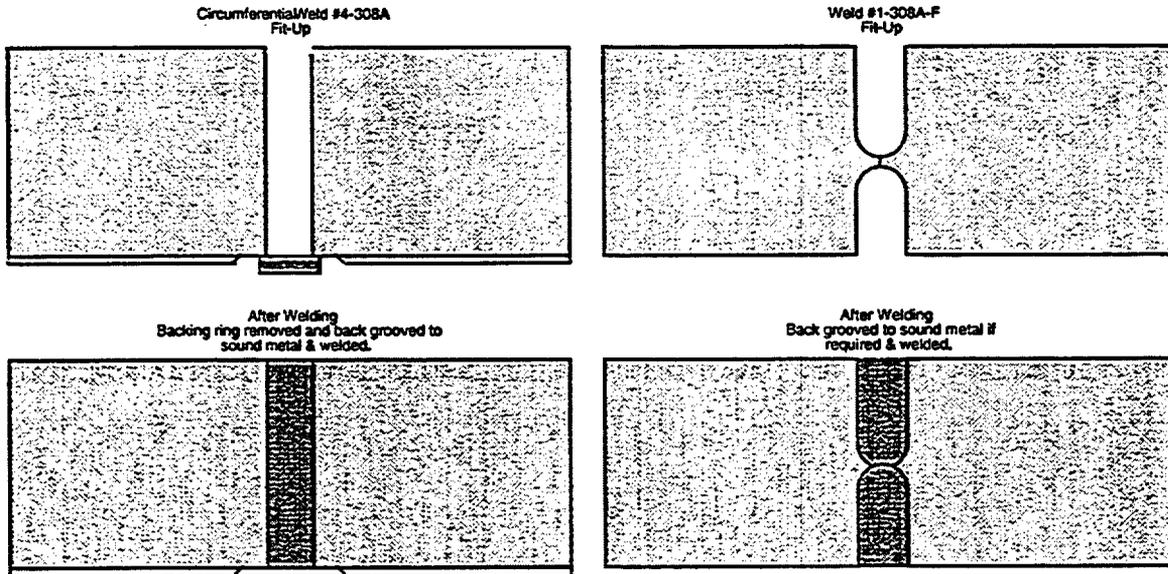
Butt-Joint Weld Profile and Double U-Joint Weld Profile
